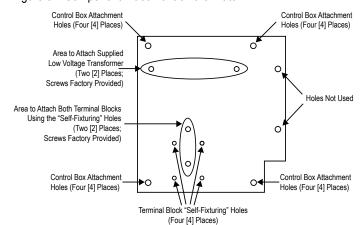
View of the Transformer and Terminal Block Assemblies Installed in the Small Frame 6-Ton Outdoor Unit Control Box.
